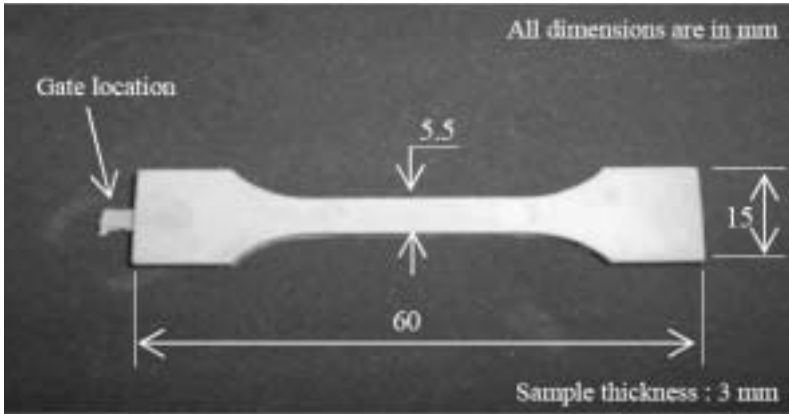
Injection Moulded Part (green part) Tensile Specimen
